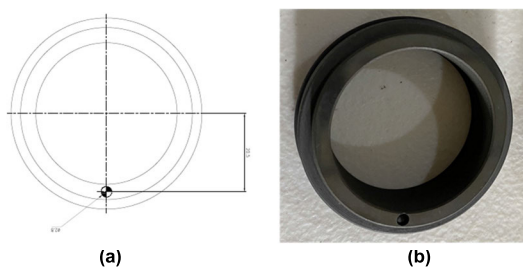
(a) Schematics of Mechanical seal having hole (b) Defective mechanical seal.
